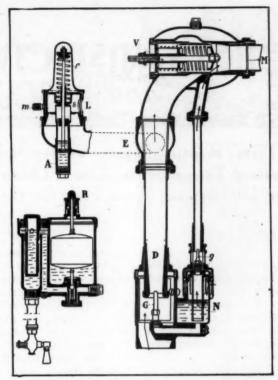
Sections of the parts of a six-cylinder carbureter used in the same cars
